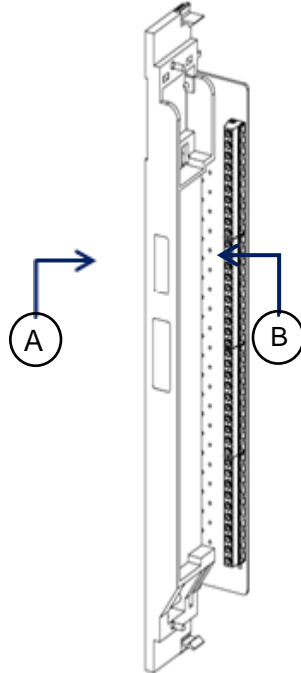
Series 90-70 to RX3i I/O Adapter Card Connector Detail
